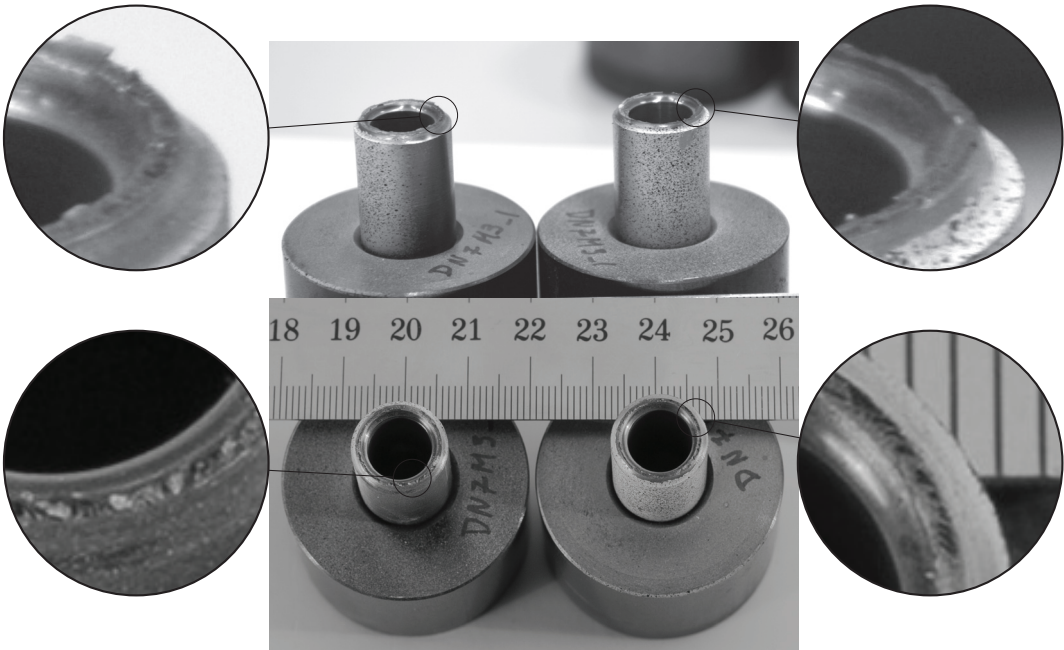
Fracture surface in monotonic for load path 3 in double notched specimens
